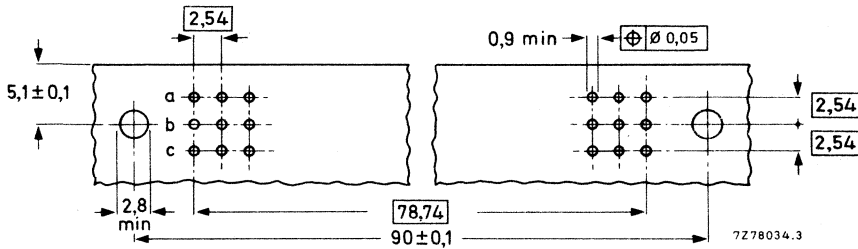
Hole pattern of the board for a female part with 3 x 32 contacts (style C); for 2 x 32 contacts (style B) the holes of row c are omitted.
